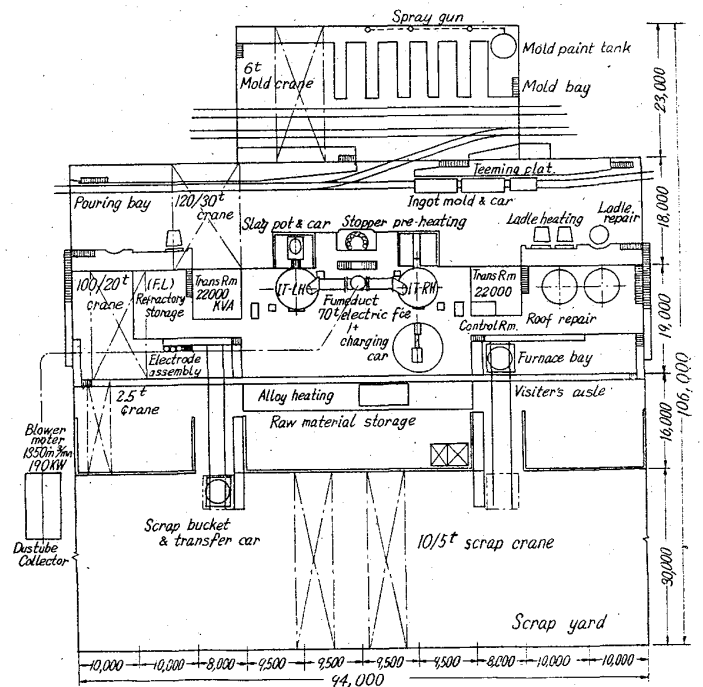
Layout of a melting shop at Chita works. (Daido steel)
